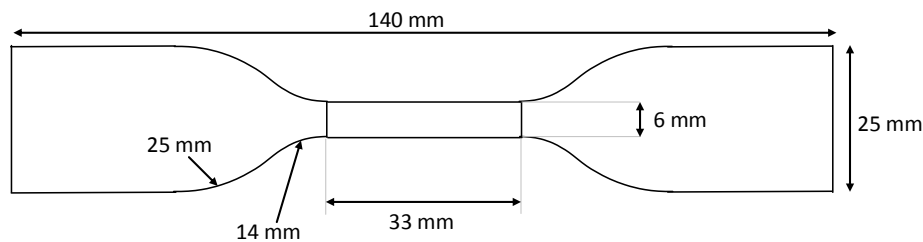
Dimensions of the dumbbell specimens as used for tension tests.
